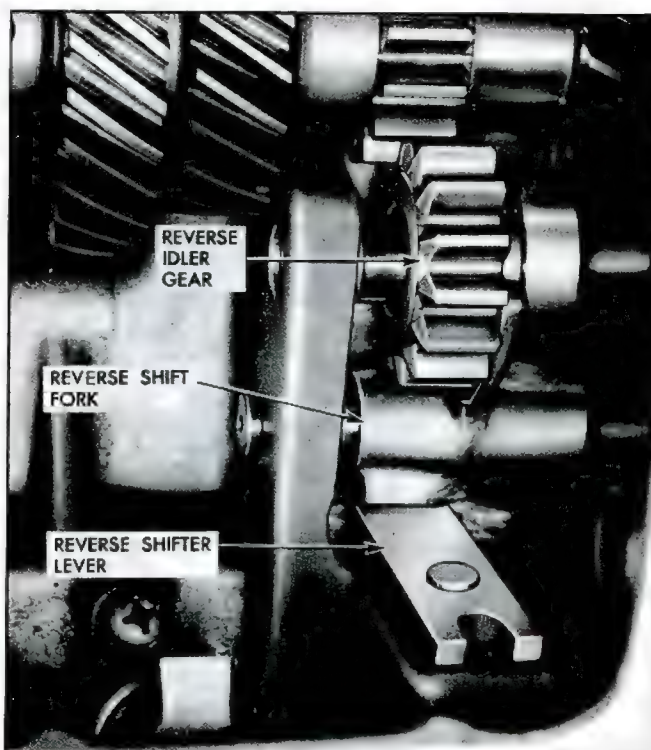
B-18—Installation of Reverse Shifter Lever, Shift Fork, and Reverse Idler Gear
